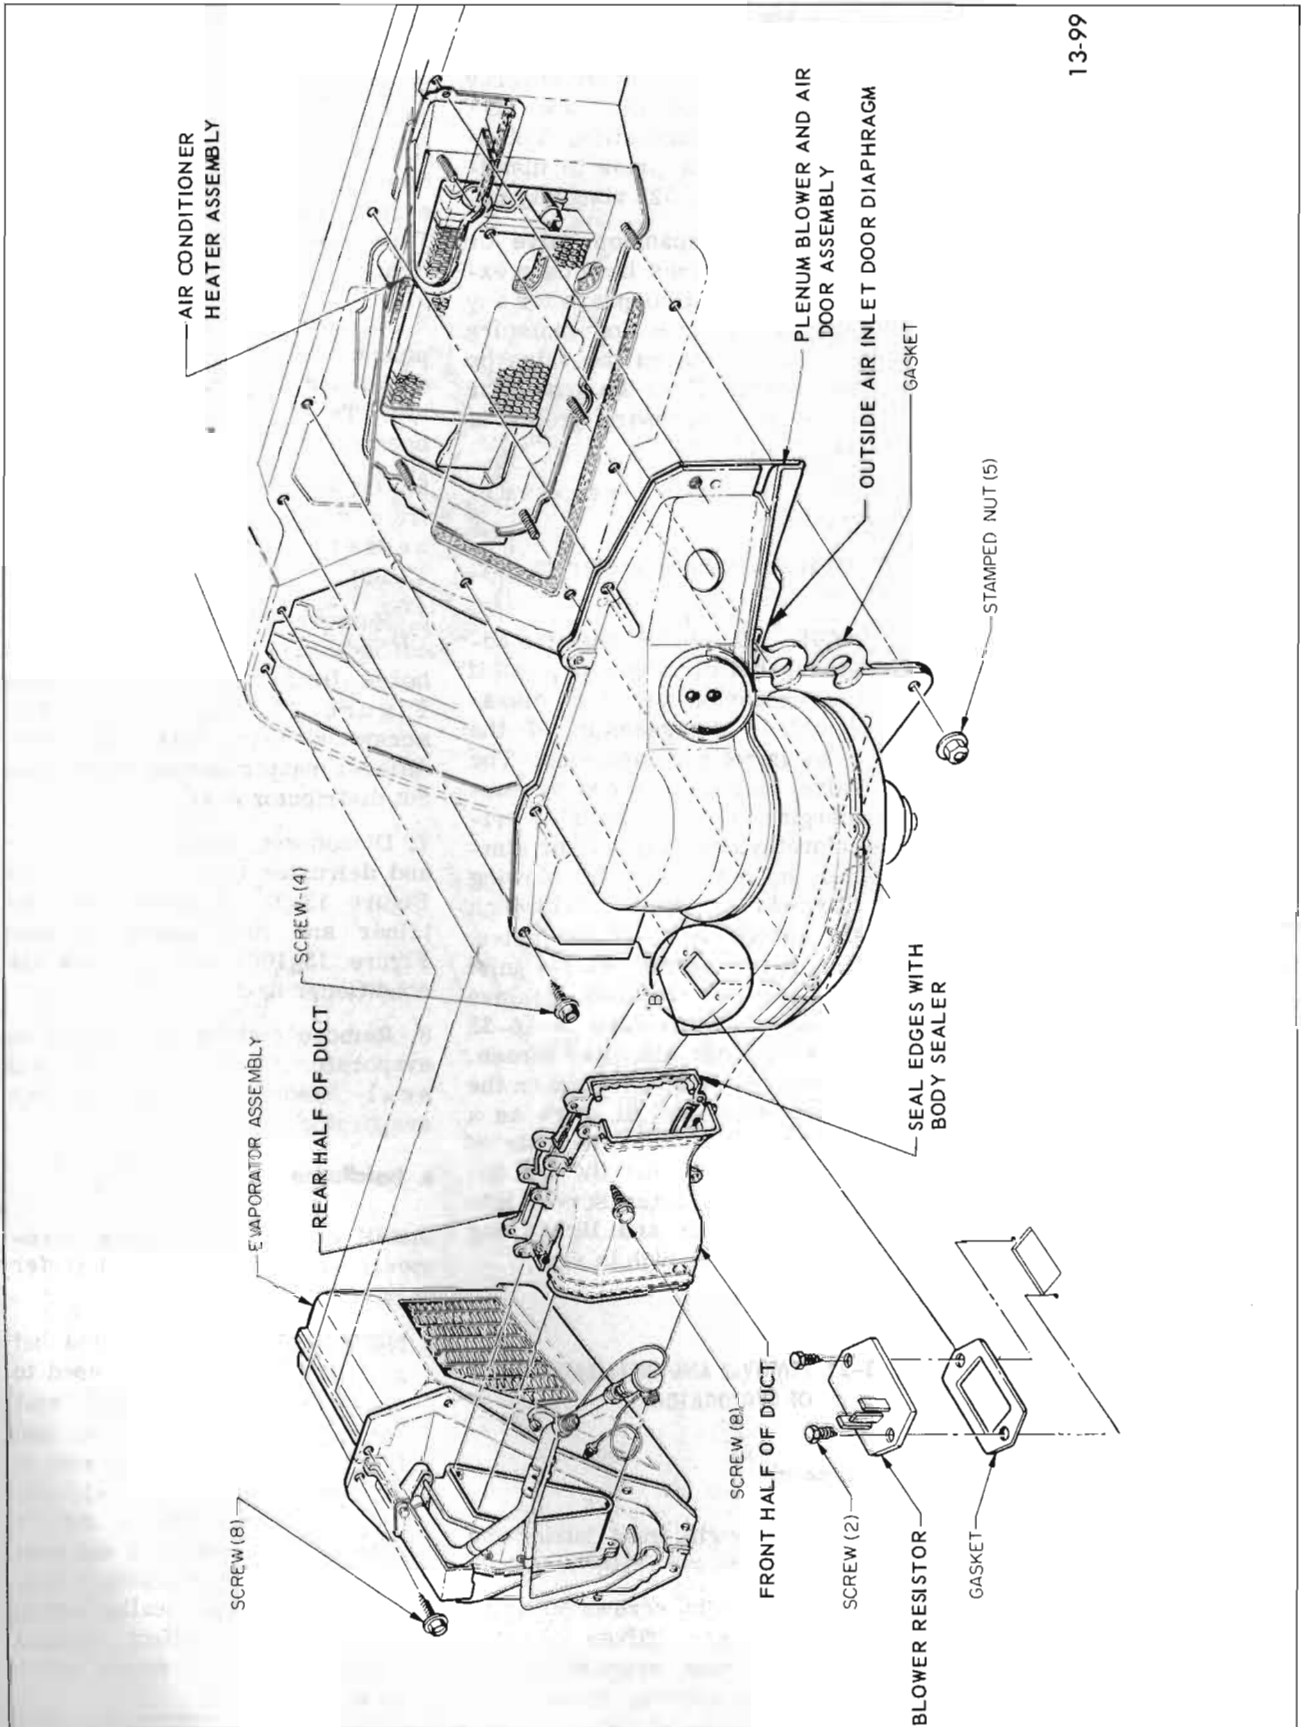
Evaporator Assembly, and Plenum Blower and Air Valve Assembly Installation
